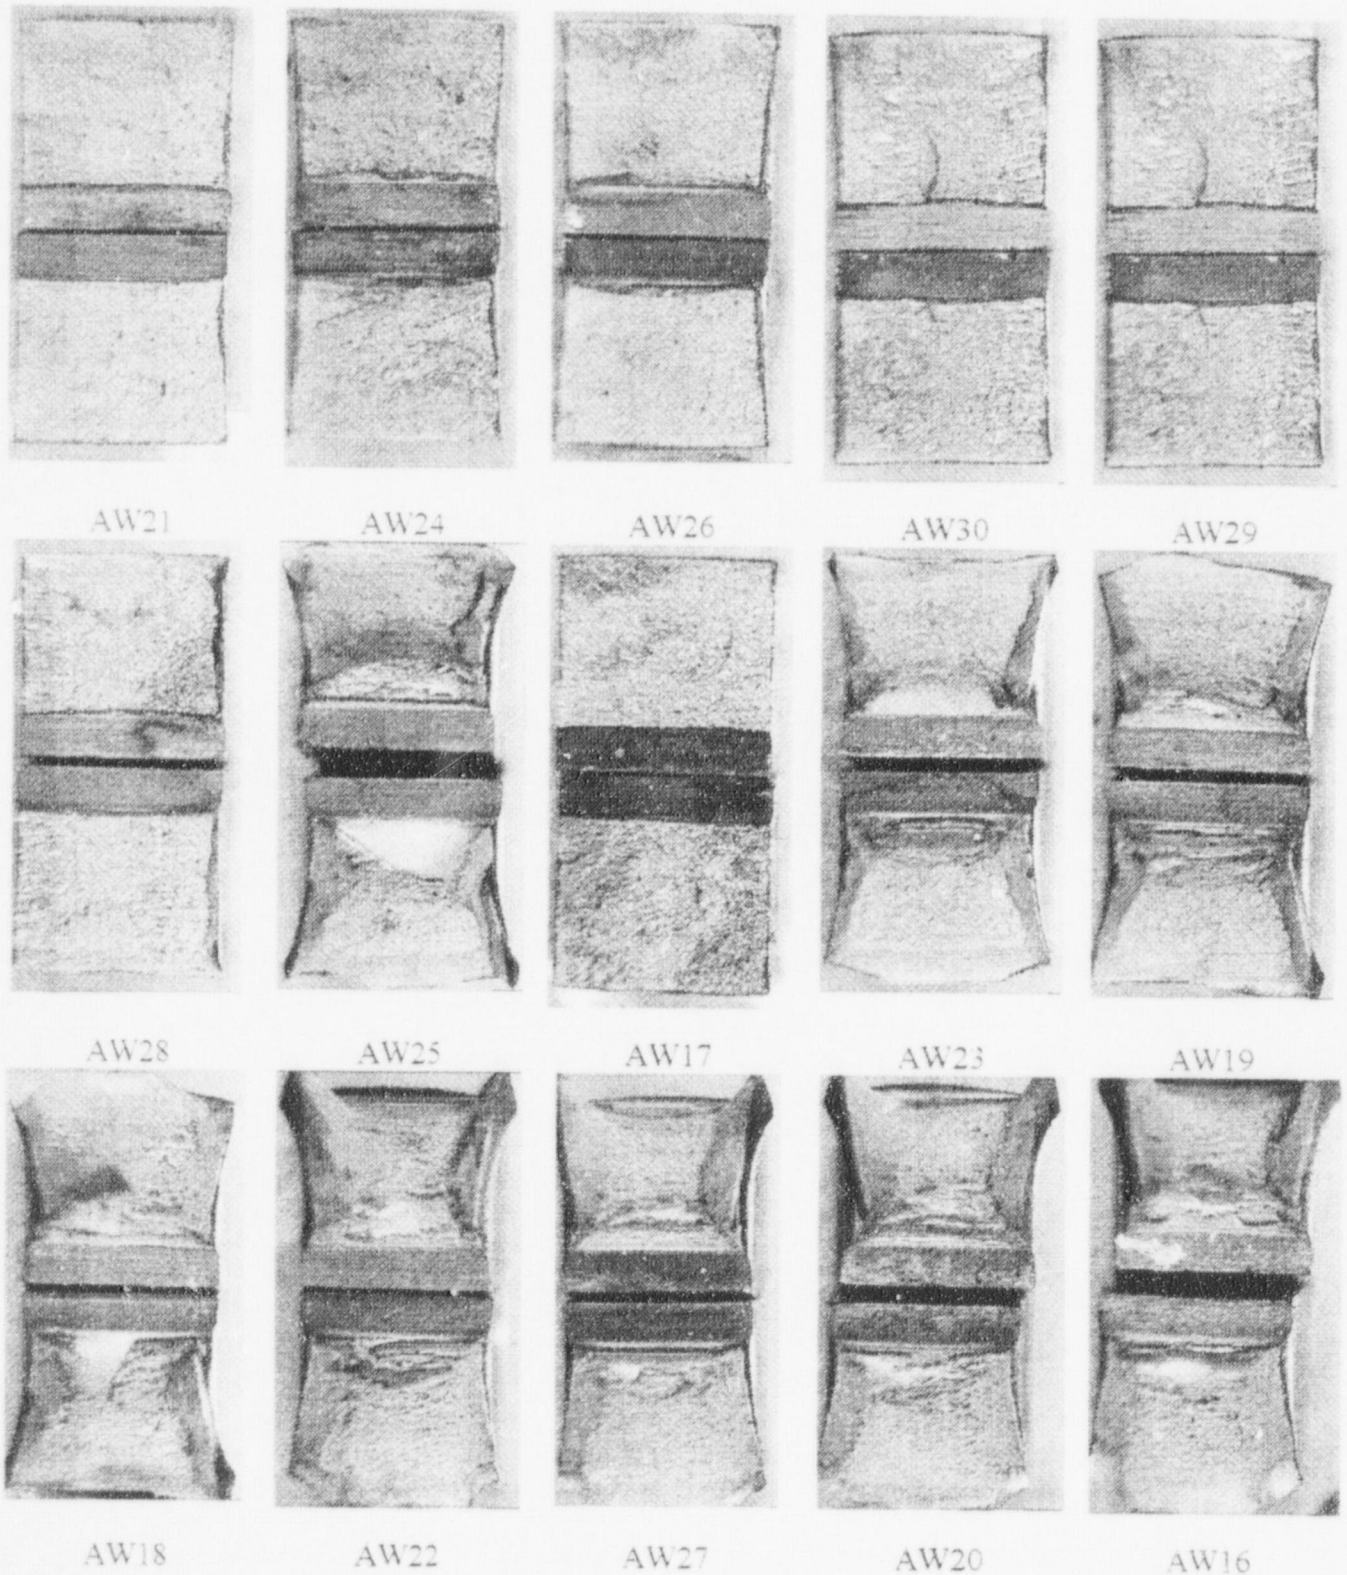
Charpy Impact Specimen Fracture Surfaces for Vogtle Unit 1 Reactor Vessel Weld Metal
